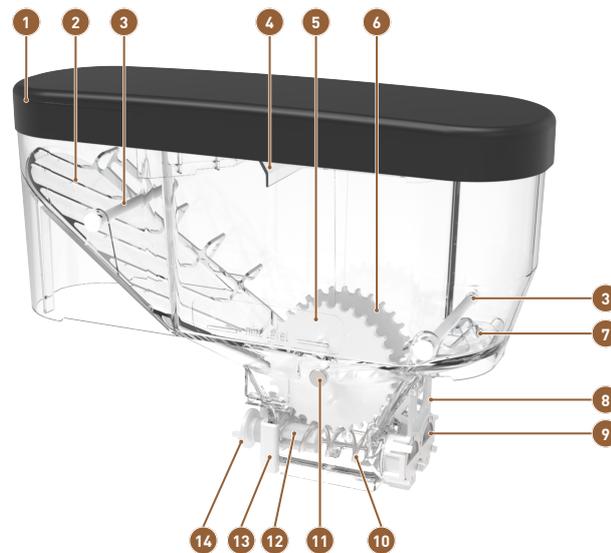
Parts of the Twin powder container (2x 1 kg)
